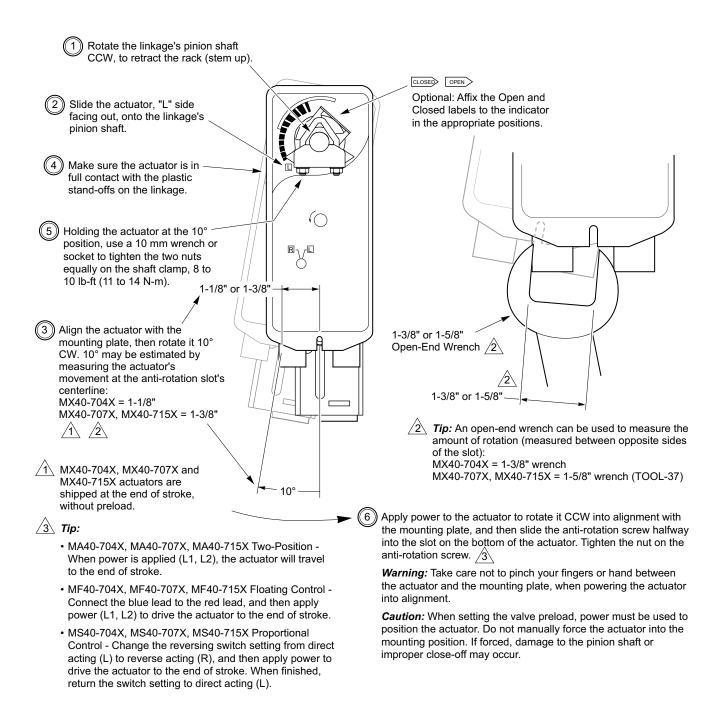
Mounting MX40-704X, MX40-707X, MX40-715X and Setting up Actuator/Linkage/Valve Assembly.
